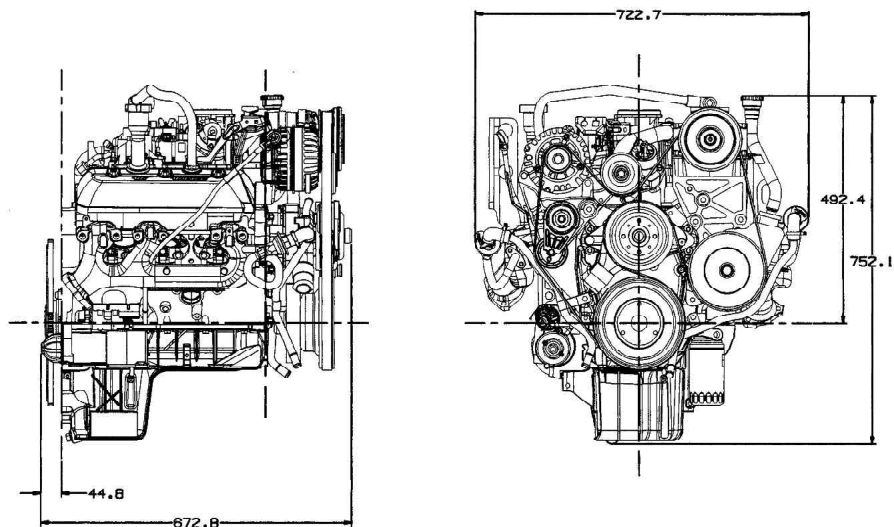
L 4.3L V6 90 Degree Packaging Dimensions
